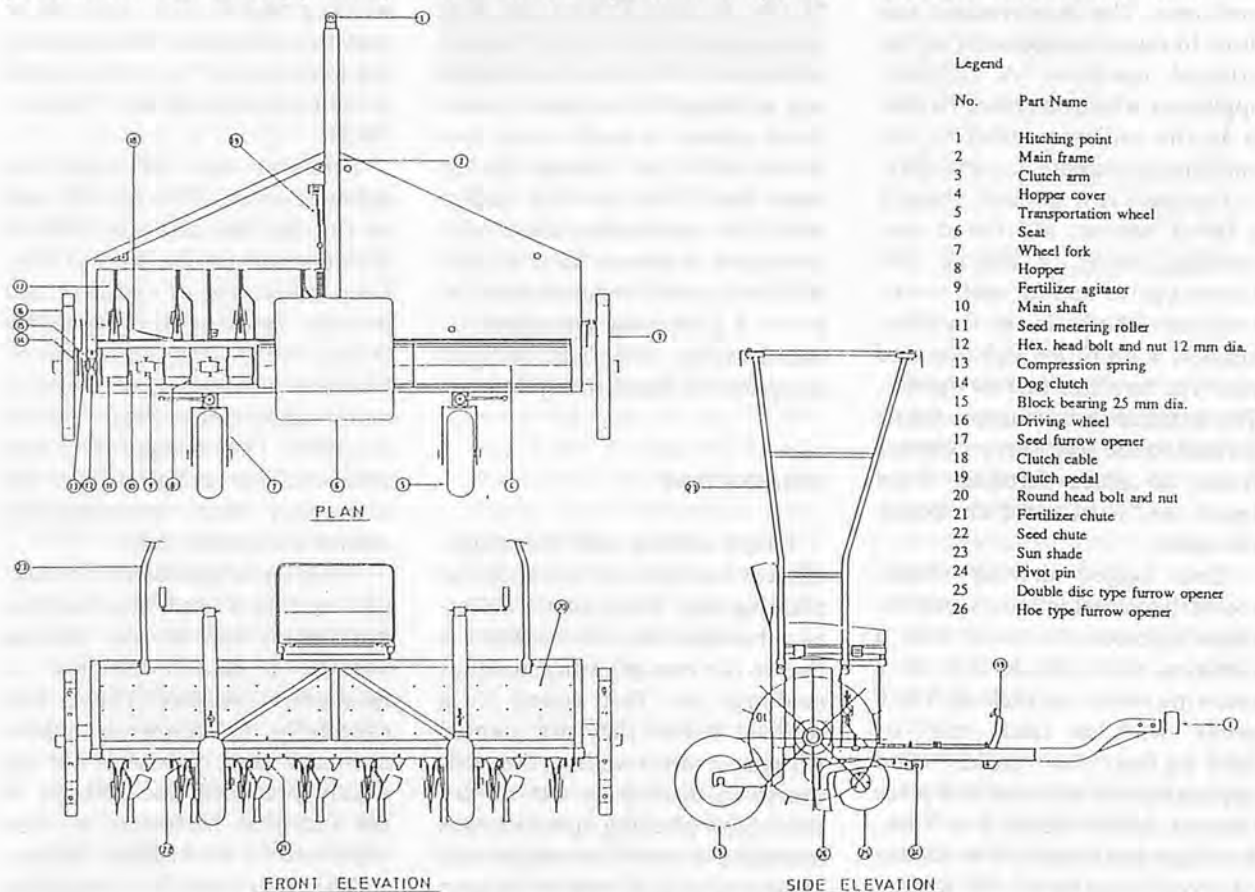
Main assembly of seed-cum-fertilizer drill.
